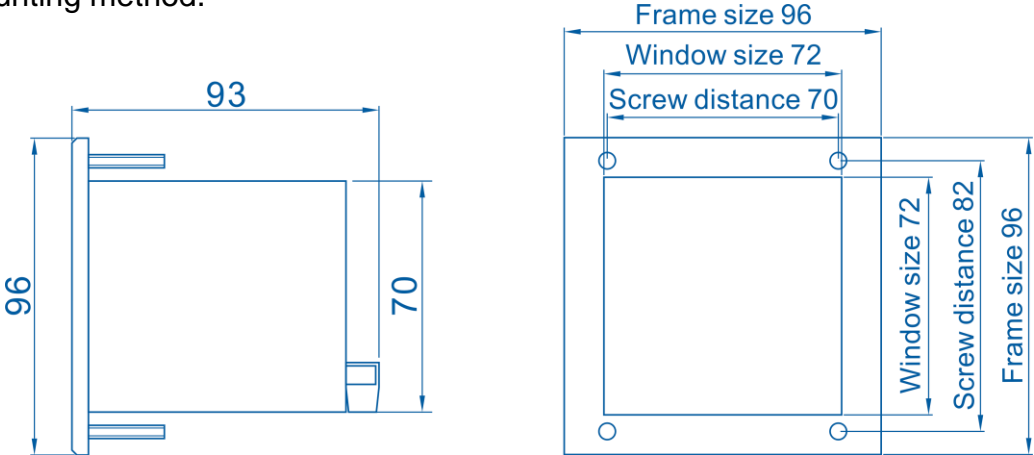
Dimension of Rudder Angle Indication Unit AD806
